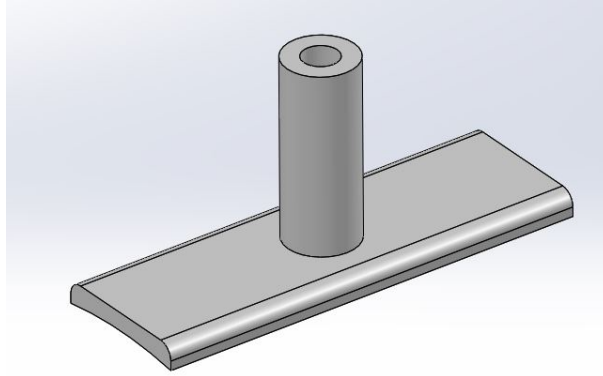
An example of a rail button extender. The rail button would be bolted to this assembly.
